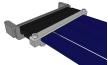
MET-BEZEL-IO146-LOCK Top View
